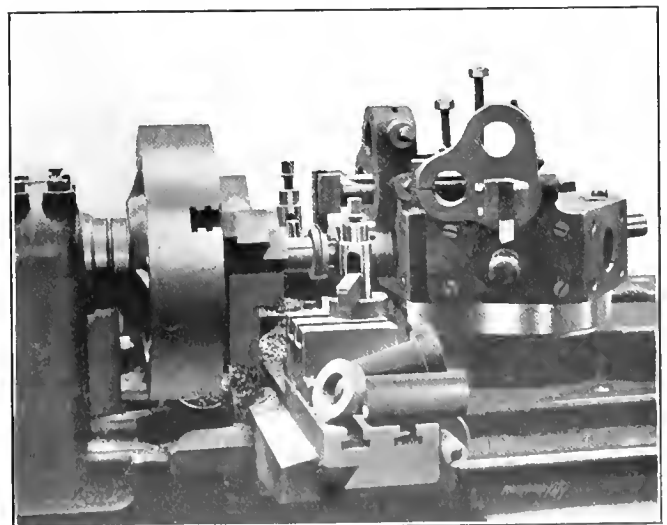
Front View of Machine set up for the Finishing Operation on the Recessed Bushing and Collar shown in the Foreground and in Fig. 4.
